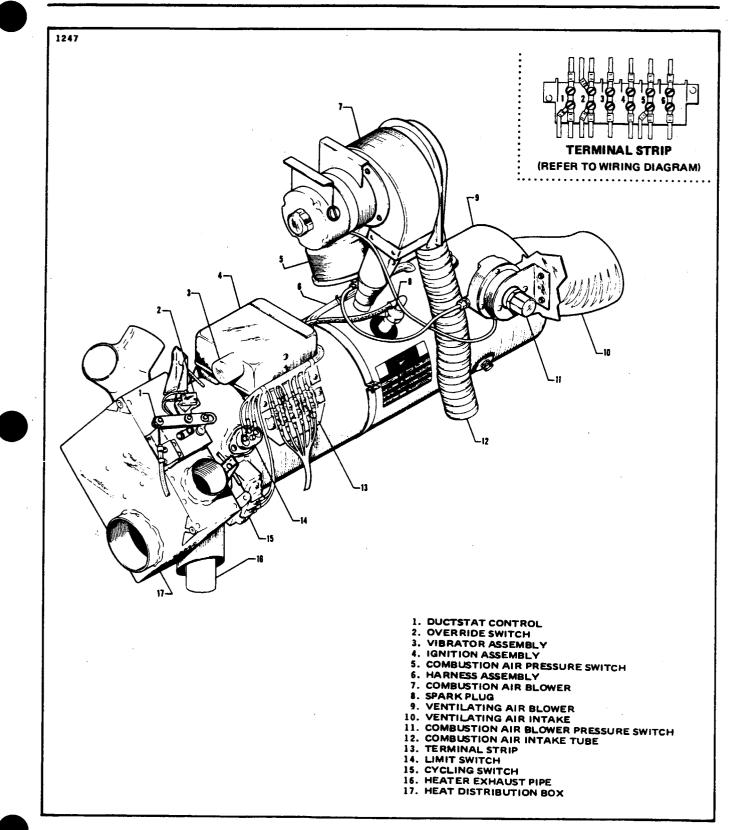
39D59 Heater Assembly and Combustion Air Blower, System No. 2
